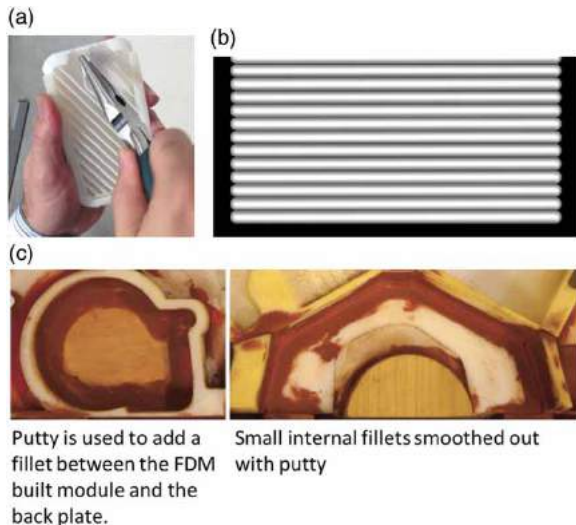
(a) Removing support material, (b) layering, and resultant surface, (c) pattern modules mounted on a back plate for sand casting core boxes, where a fillet and smooth blending could not be achieved without hand work.
